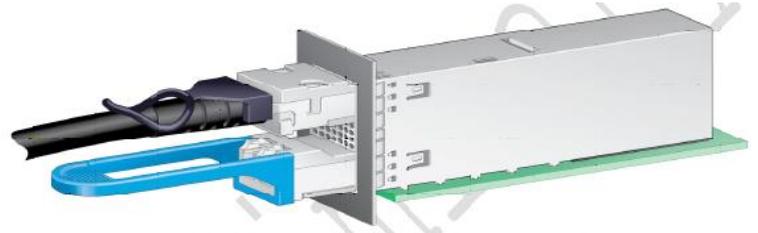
QSFP-DD 2x1 stacked cage pluggable and direct attach module rendering
